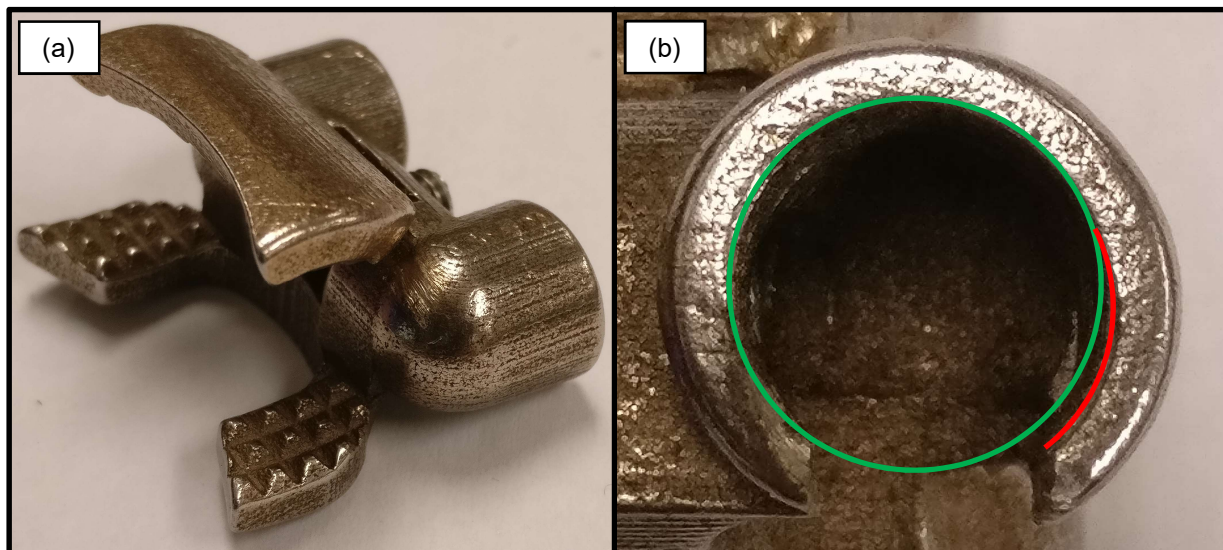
a) Stainless steel prototype manufactured by 3D printing and b) detail showing splaying that occurred during the thread tapping process
